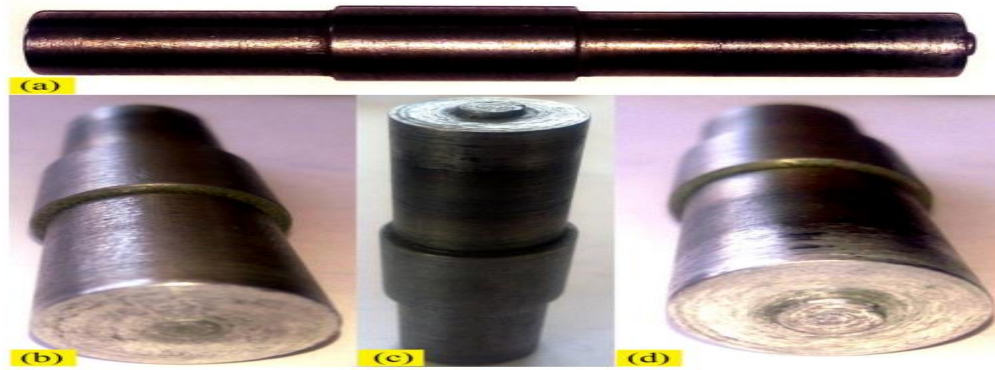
M2 HSS Tool Used For Friction Stir Welding
